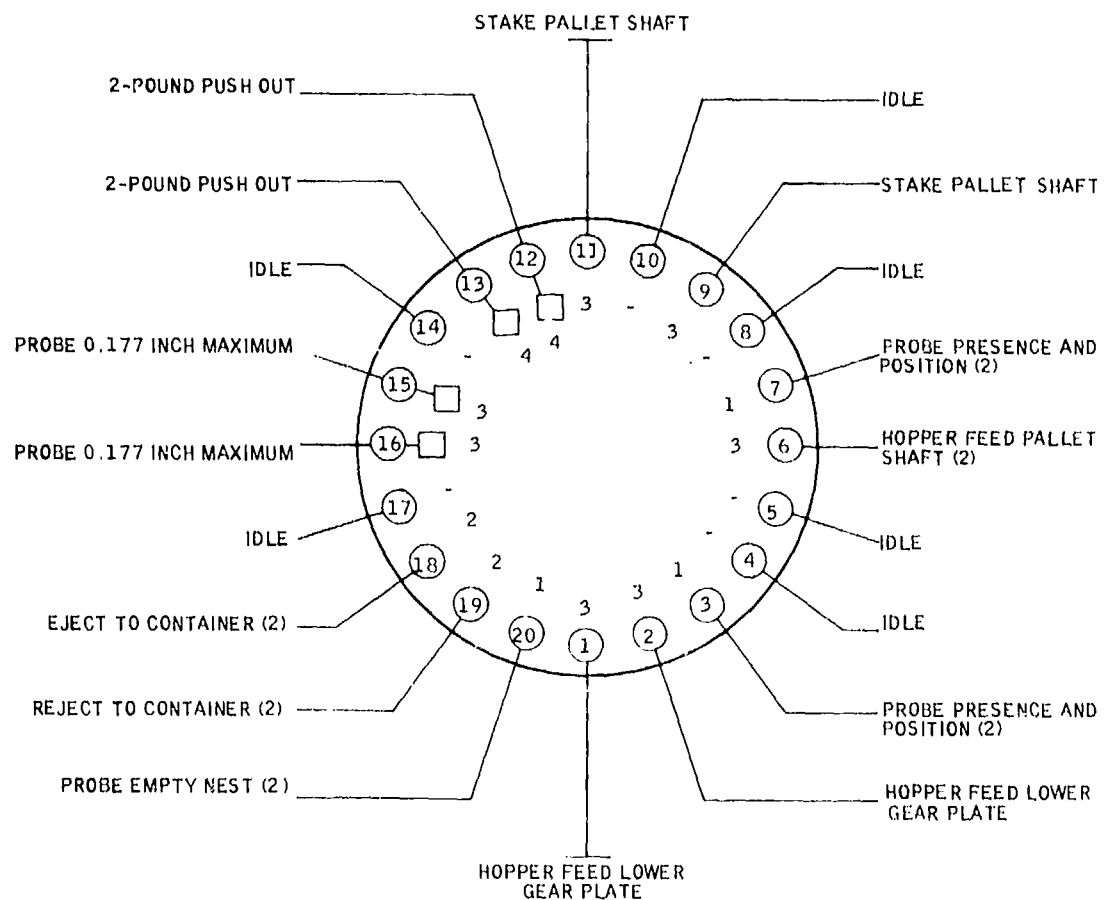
Dial schematic, machine S3 - lower plate and shaft assembly
